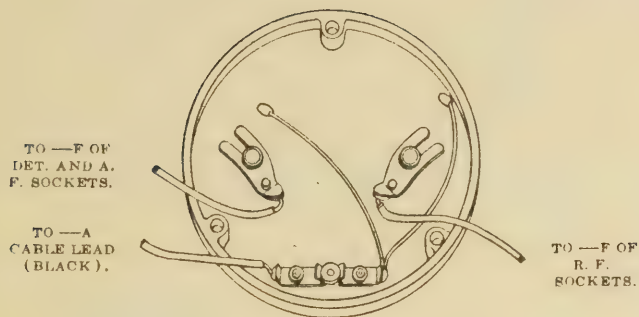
REAR VIEW OF DOUBLE RHEOSTAT AND FILAMENT SWITCH ASSEMBLY USED IN MODELS 20 (No. 4640-7570), 19 AND 21.
